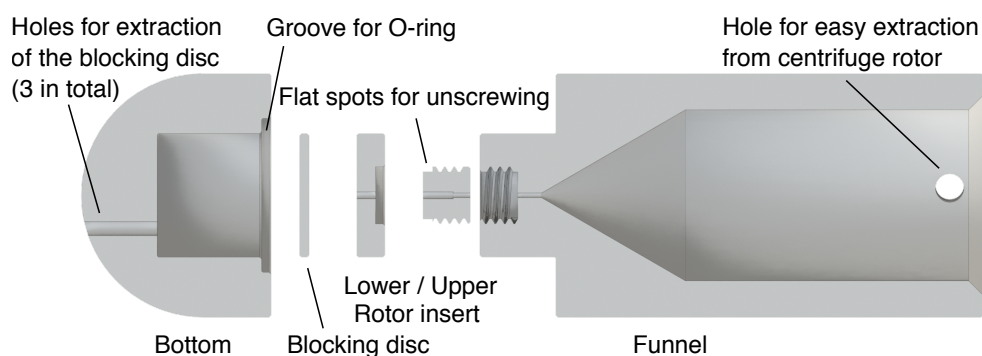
Rotor packing tool adapted for compatibility with the Bruker rotor grabber.
